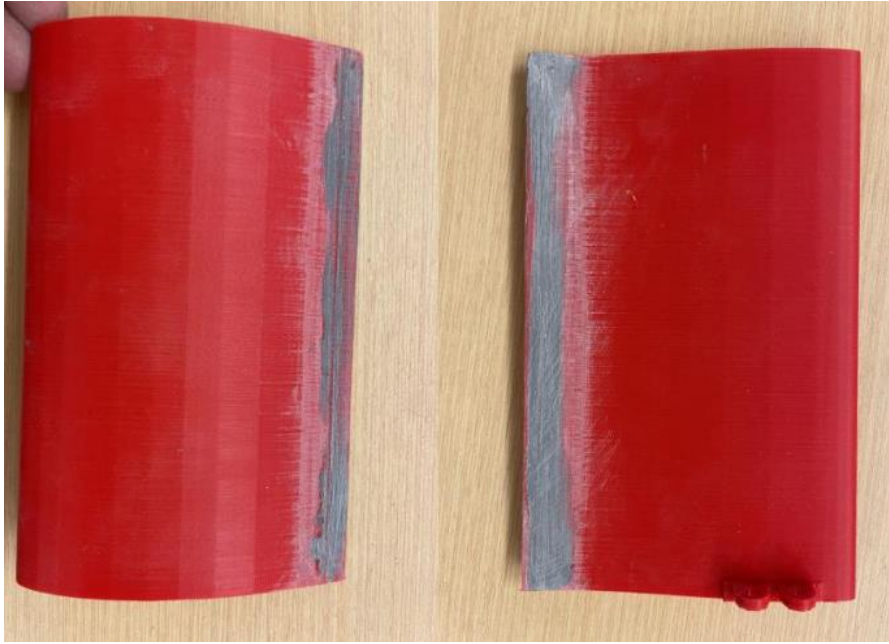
3D Printed Airfoil Sections for the Rectangular Wing
